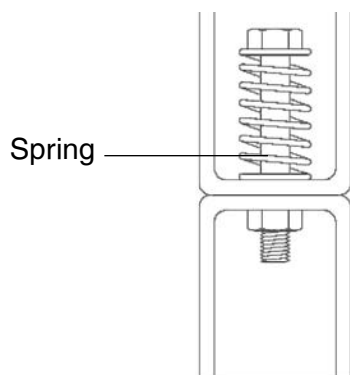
High Compression Spring Between the Mounting Bolt and Upper Bracket
